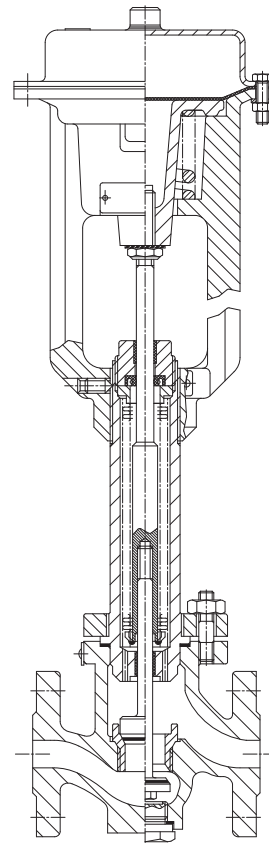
· Type 3351-1 Pneumatic On-off Valve version with bellows seal
